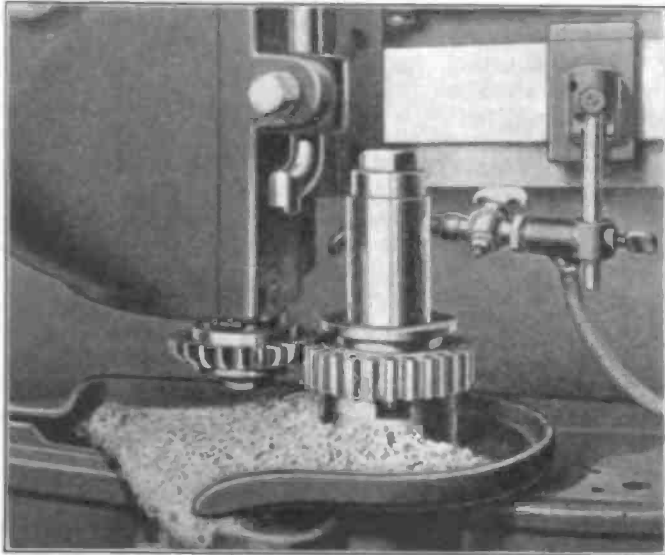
Cutter-slide, cutter and cutter-spindle of gear shaper for helical gear work
